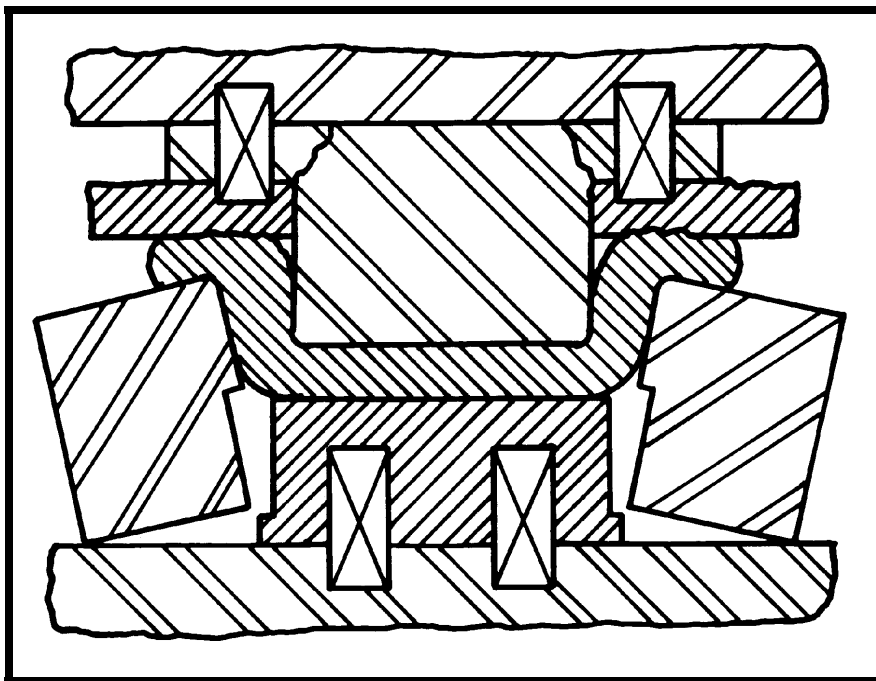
Section through a bending or forming die. If the stock is too thick misformed parts as well as severe damage can occur. *Smith & Associates
